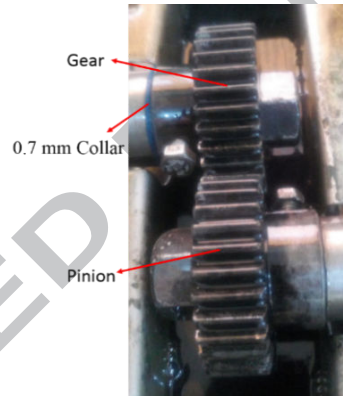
Gearbox (with Axial misalignment spacer collar)
